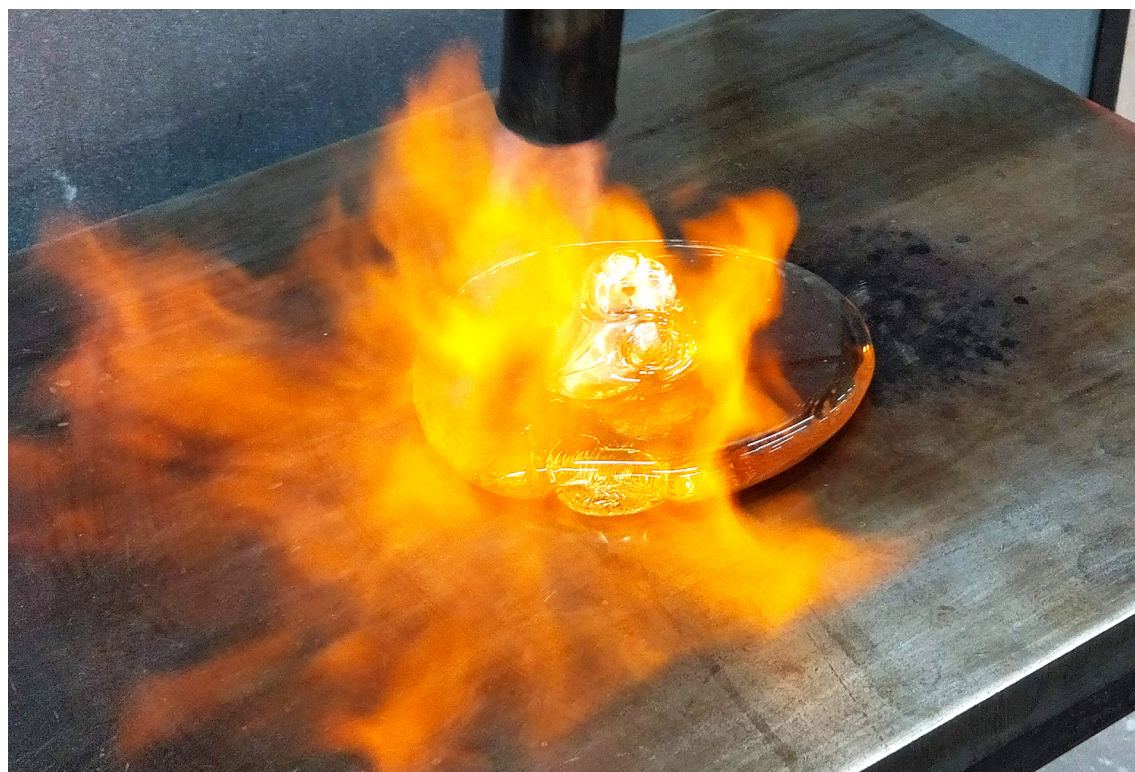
Heating the bone china form through the process of encapsulation in glass.
